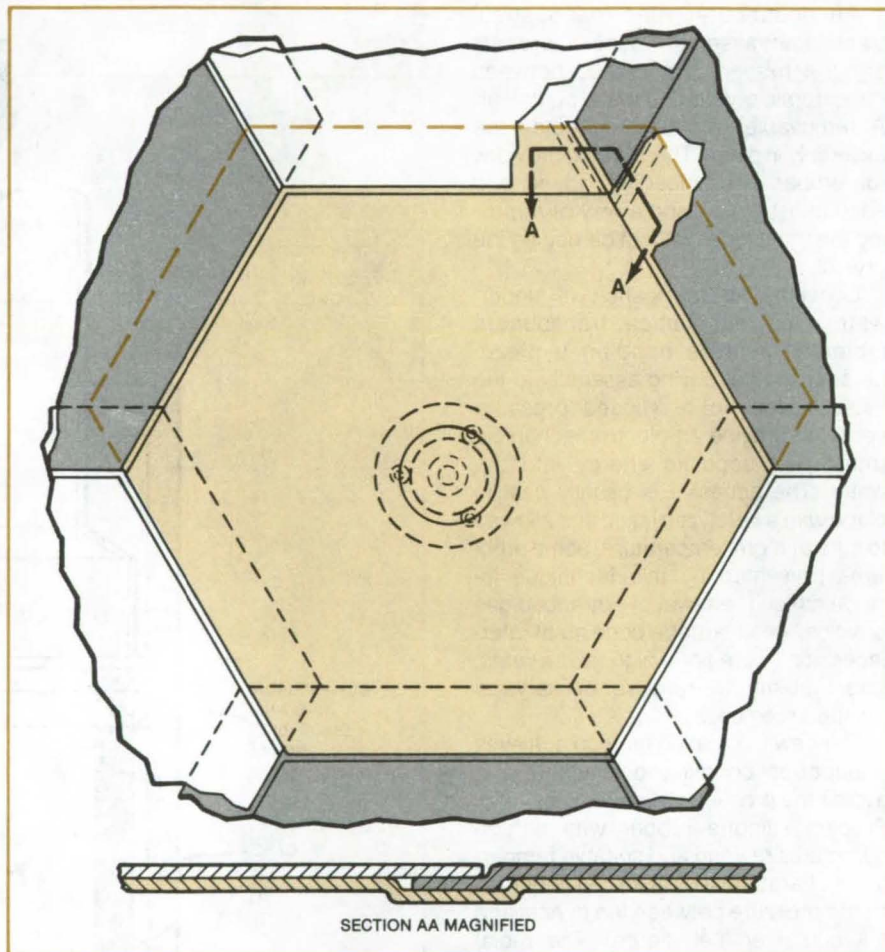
Adjacent Panels Have Stepped Edges so that they nest together in a hexagonal array and present a smooth outer surface.
